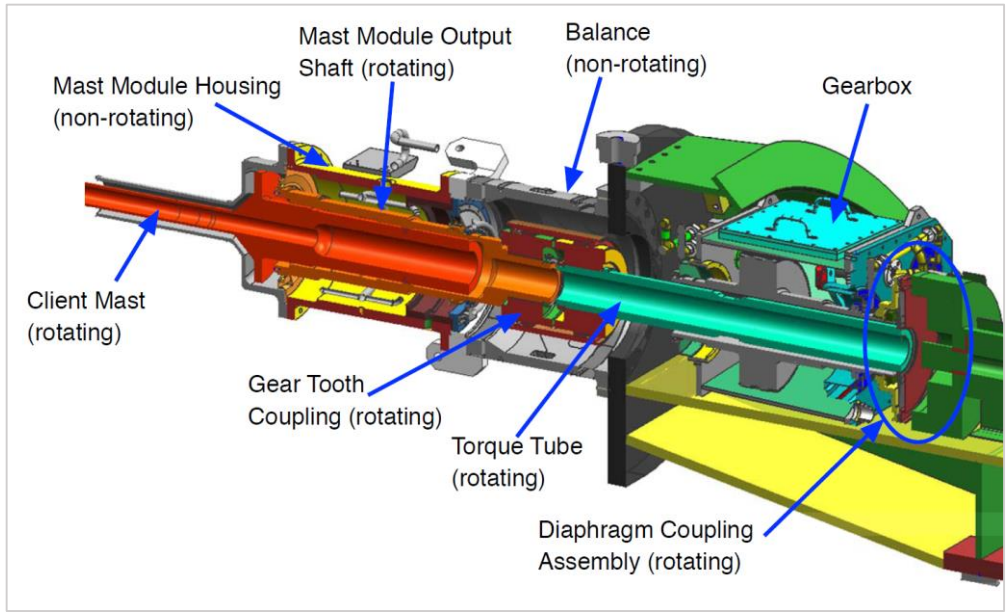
Torque tube and instrumented shaft flex-coupling are located in the fixed frame.
